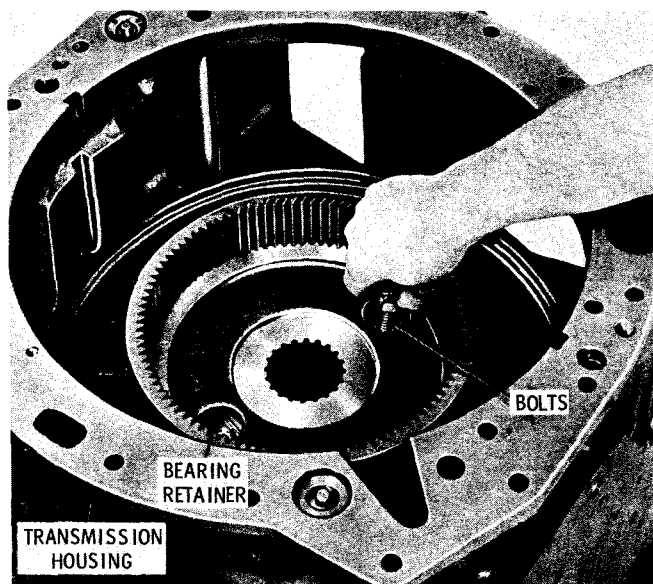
Installing splitter ring gear and bearing retainer bolts
